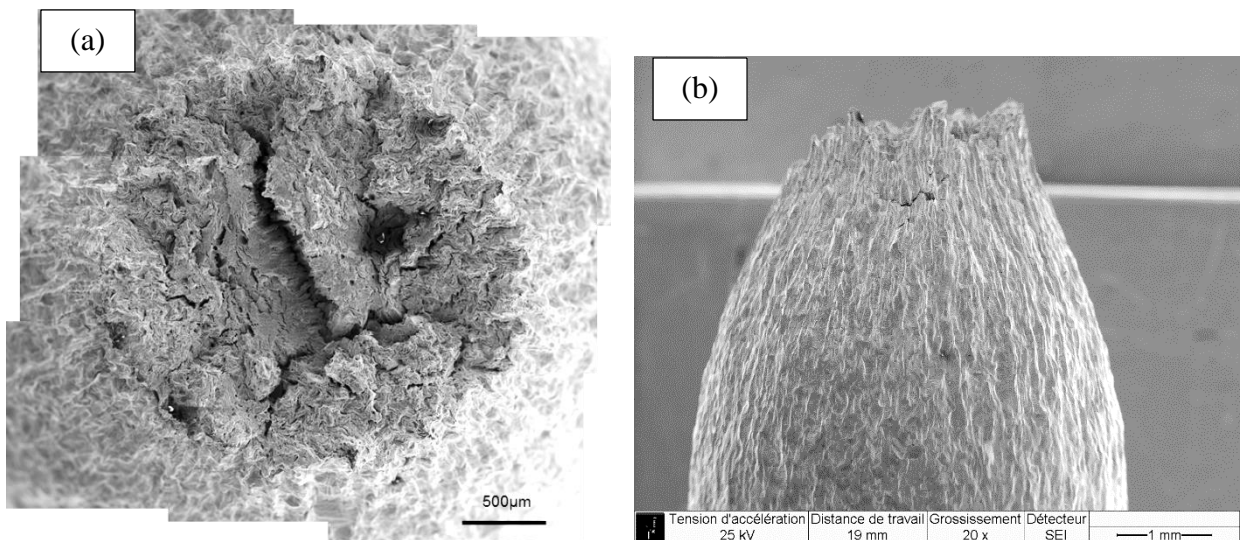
26 SEM images of the fracture surface (a) and the side view of fracture part (b) of the specimen tested under hydrogen at $d\varepsilon/dt = 5 \times 10^{-6} s^{-1}$ (FCS8).
